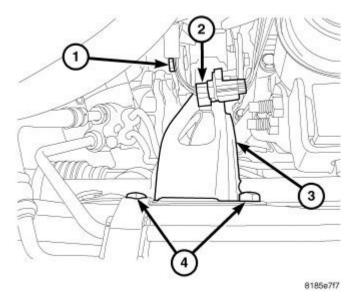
Rear Mount Through Bolt, Oxygen Sensor Connector, Rear Mount & Rear Mount Retaining Bolts
